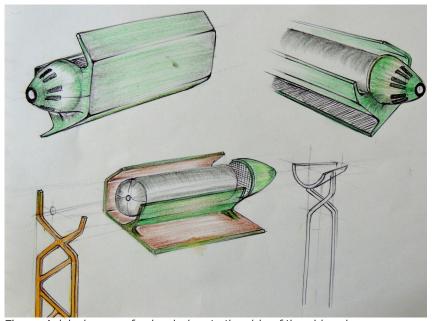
Axial winnower fan loaded on to the side of threshing drum
